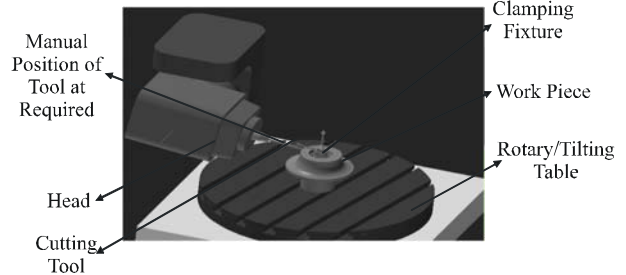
EXPERIMENTAL SETUP FOR MACHINING OF IMPELLER BY MANUAL POSITIONING METHOD
